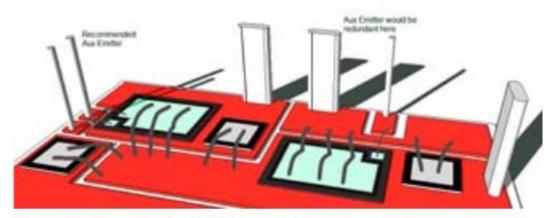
Example of a DCB layout with, and without, auxiliary emitter terminal
